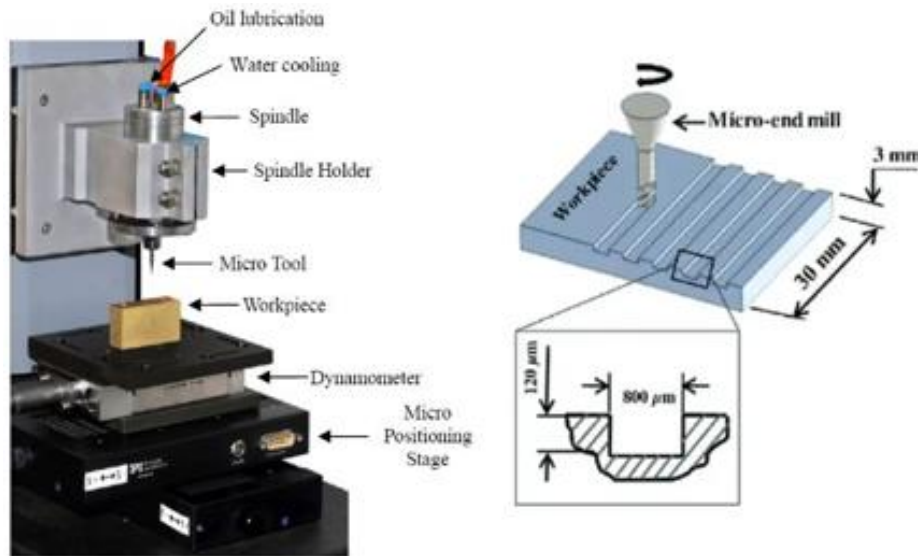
Photograph shows the micromachining process, specifically micromilling (left), and the result of the process on a metallic material for the creation of channels with micrometric dimensions (right) [93].
